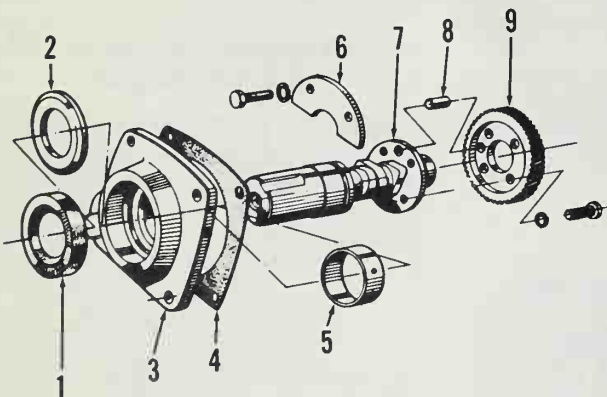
Exploded view of bushing-supported camshaft used on some engines.
